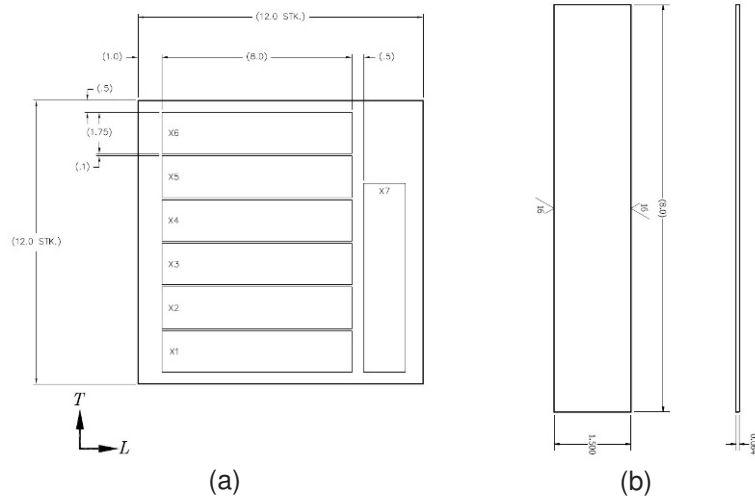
(a) Basic coupon dimensions and material orientations (b) coupon dimensions after machining
